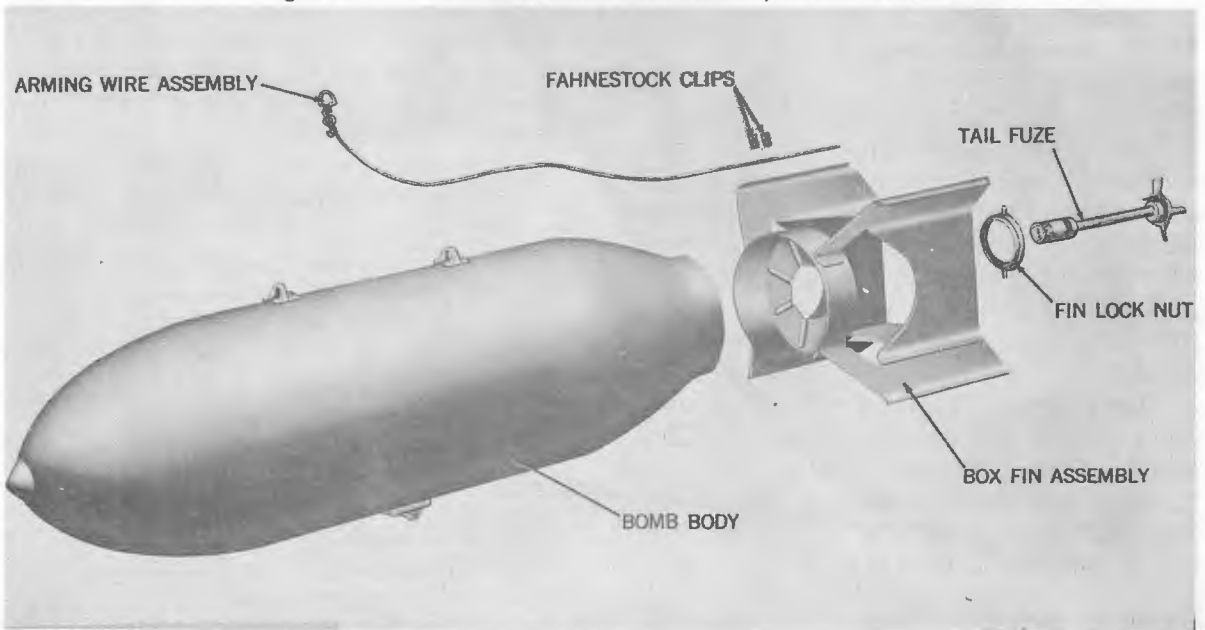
1000-lb SAP Bomb AN-M59A1, Exploded View.
